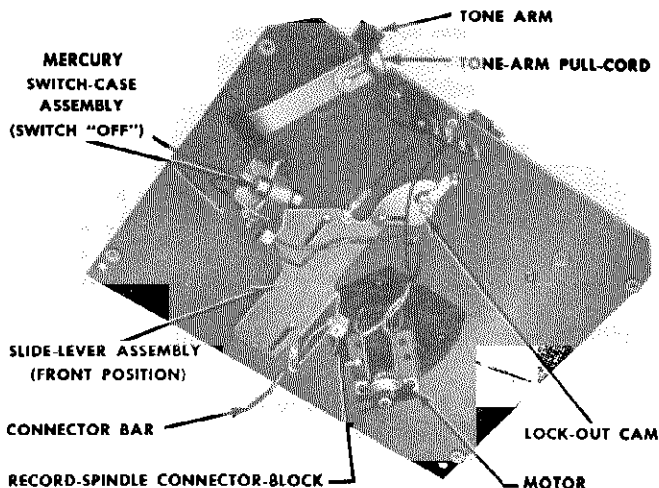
BOTTOM VIEW, COMPONENTS IN OPEN-DOOR POSITIONS, WITHOUT RECORD.
